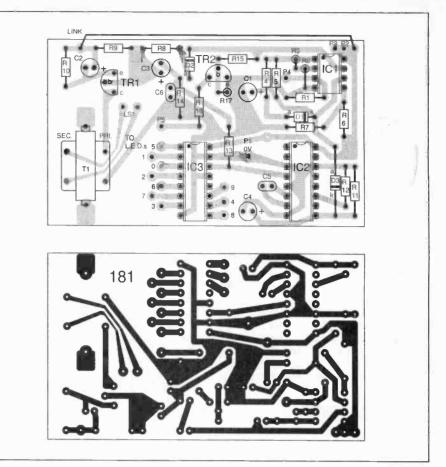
Printed circuit board component layout and full size underside copper foil master pattern.
